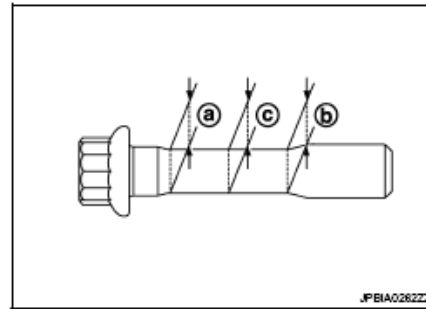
Identifying Connecting Rod Bolt Outer Diameter
